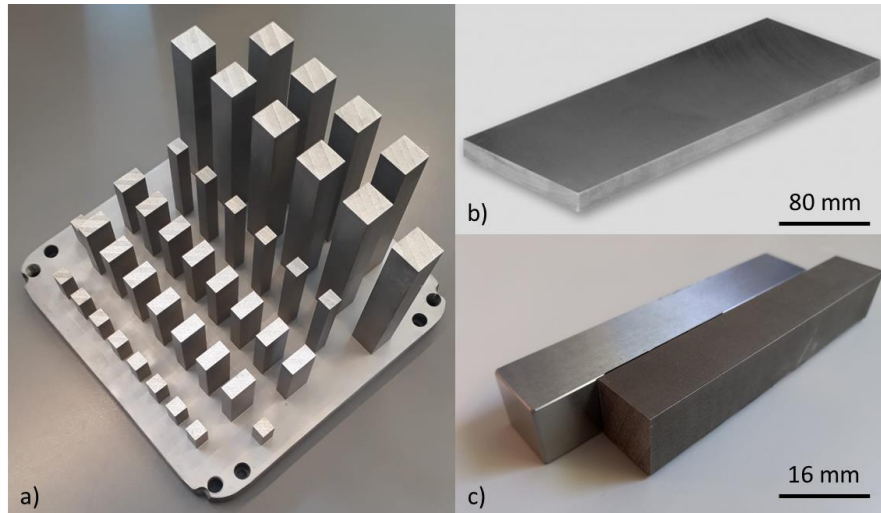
a) As-built AM material samples attached to build plate, b) CM steel plate, c) CM and AM specimens produced (dimensions: 120x20.5x20.5 mm³).
